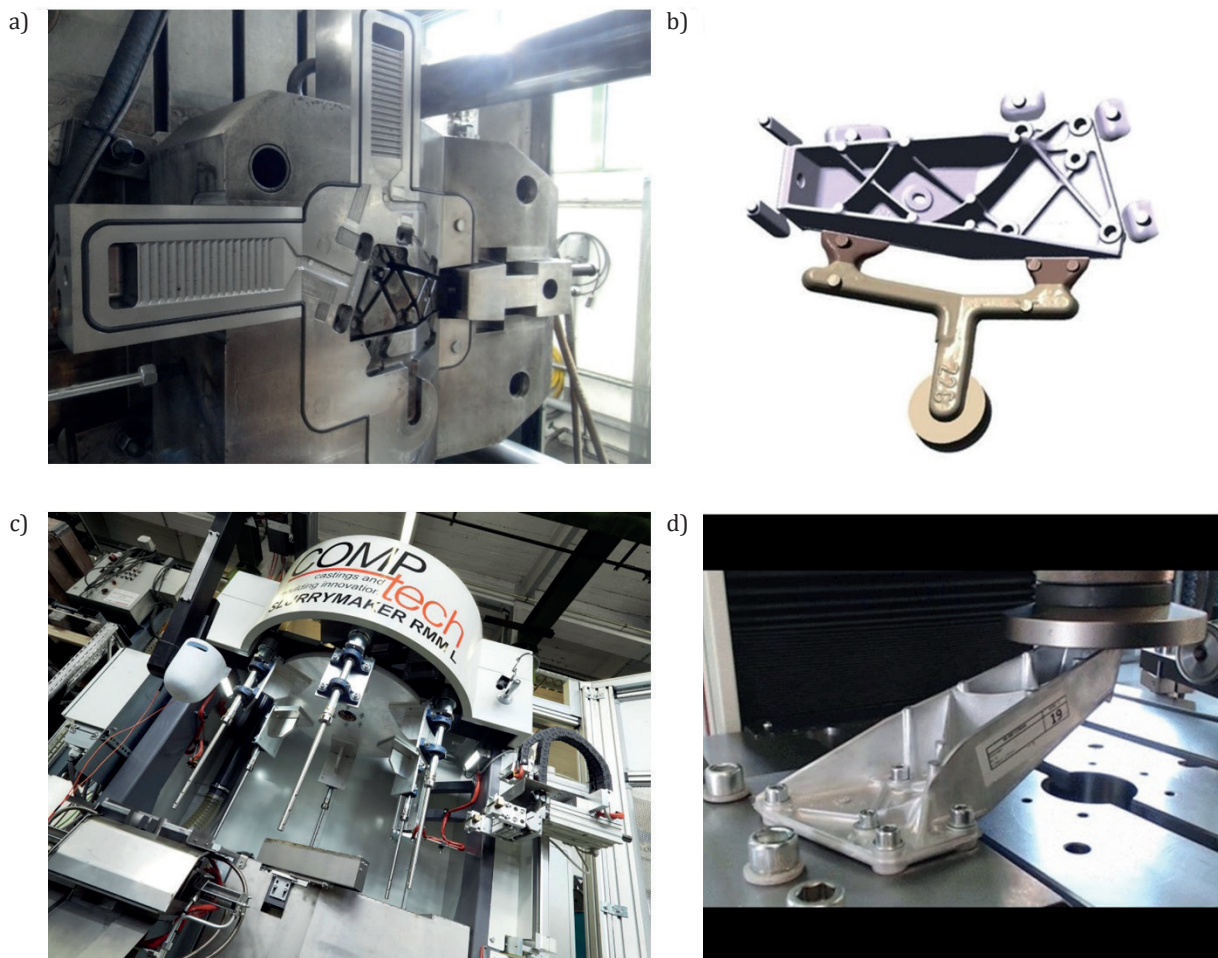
Experimental facilities used in the present work: a) movable part of the mould; b) geometry of the engine mount; c) slurry maker from Comptech AB; d) engine mount component testing
